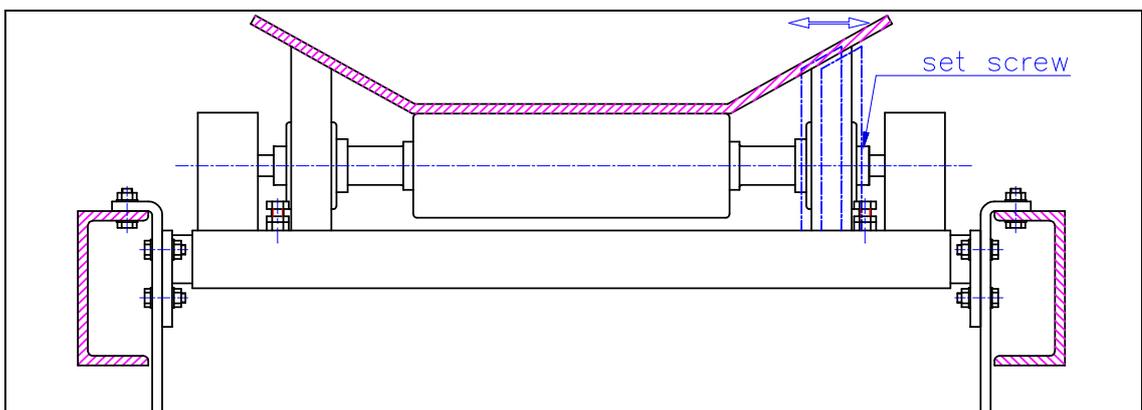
The side disks (only troughed measuring roller) have to be adjusted laterally until they are aligned with the neighbouring side rollers B600005e
